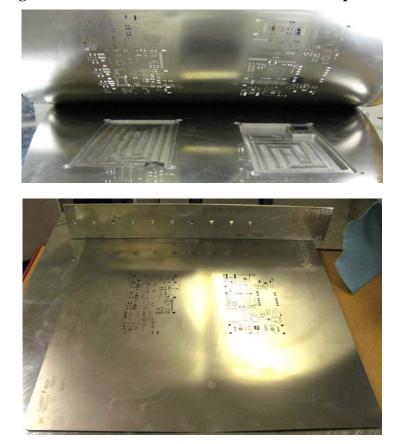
GPS-ATD circuit board fixture for applying RoHS solder paste
